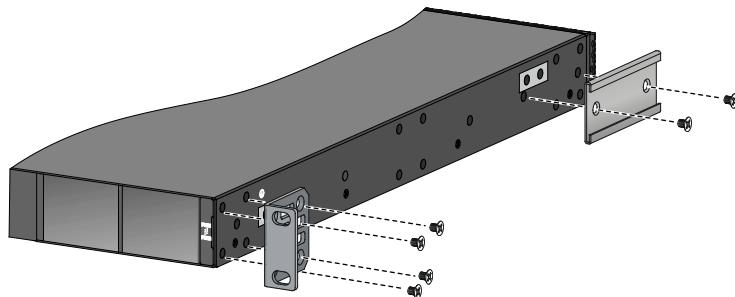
Attaching the mounting brackets and chassis rails to an HPE 5710-30HT switch (mounting brackets installed near the power supply side)
